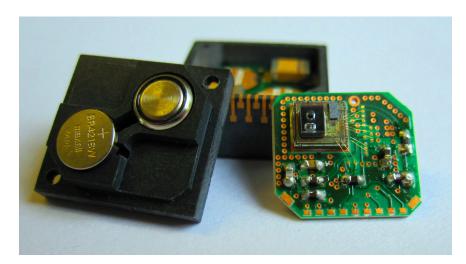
3D ASIC stack mounted onto a PCB.
